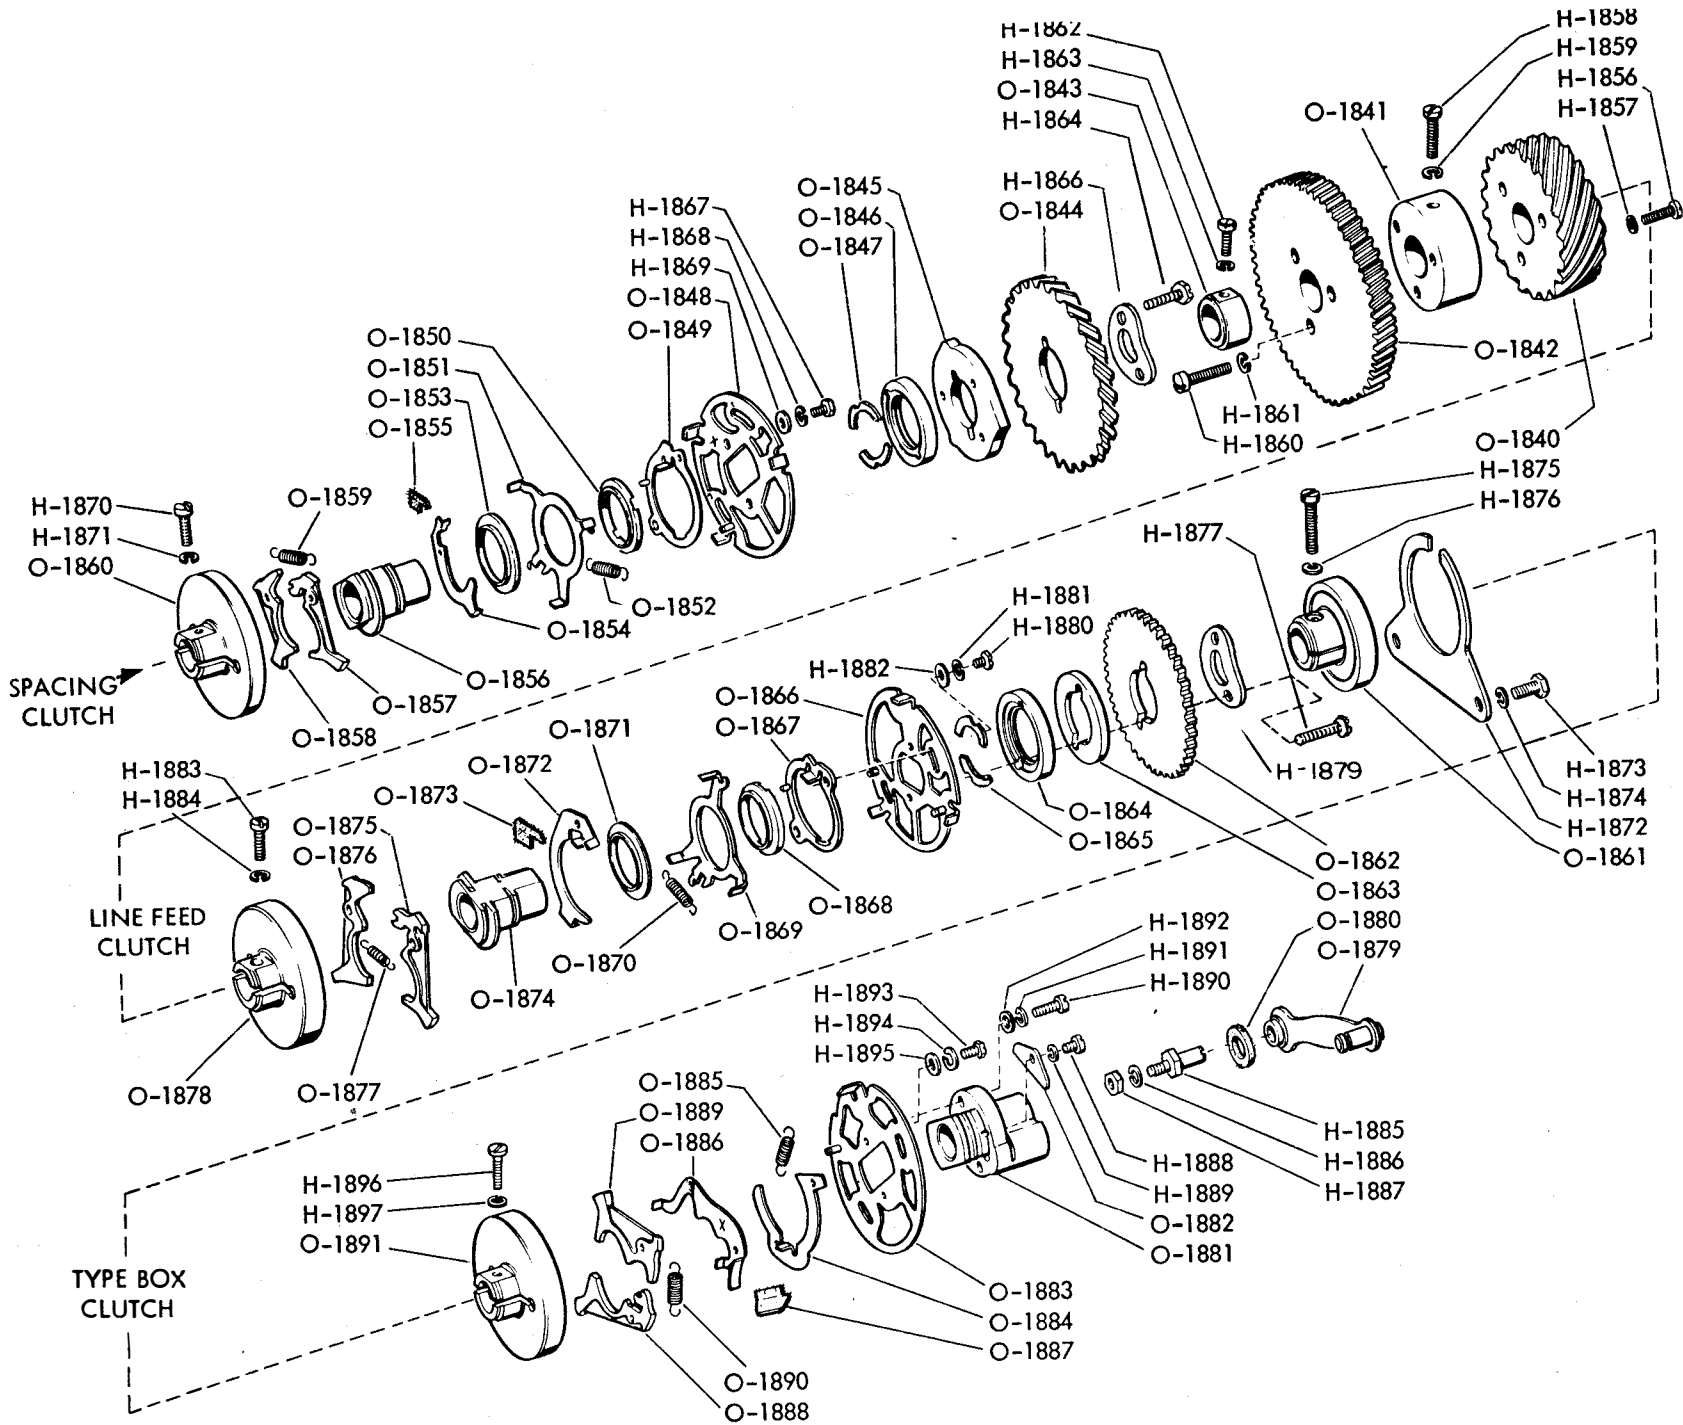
Automatic Typewriter, Main Shaft Mechanism
